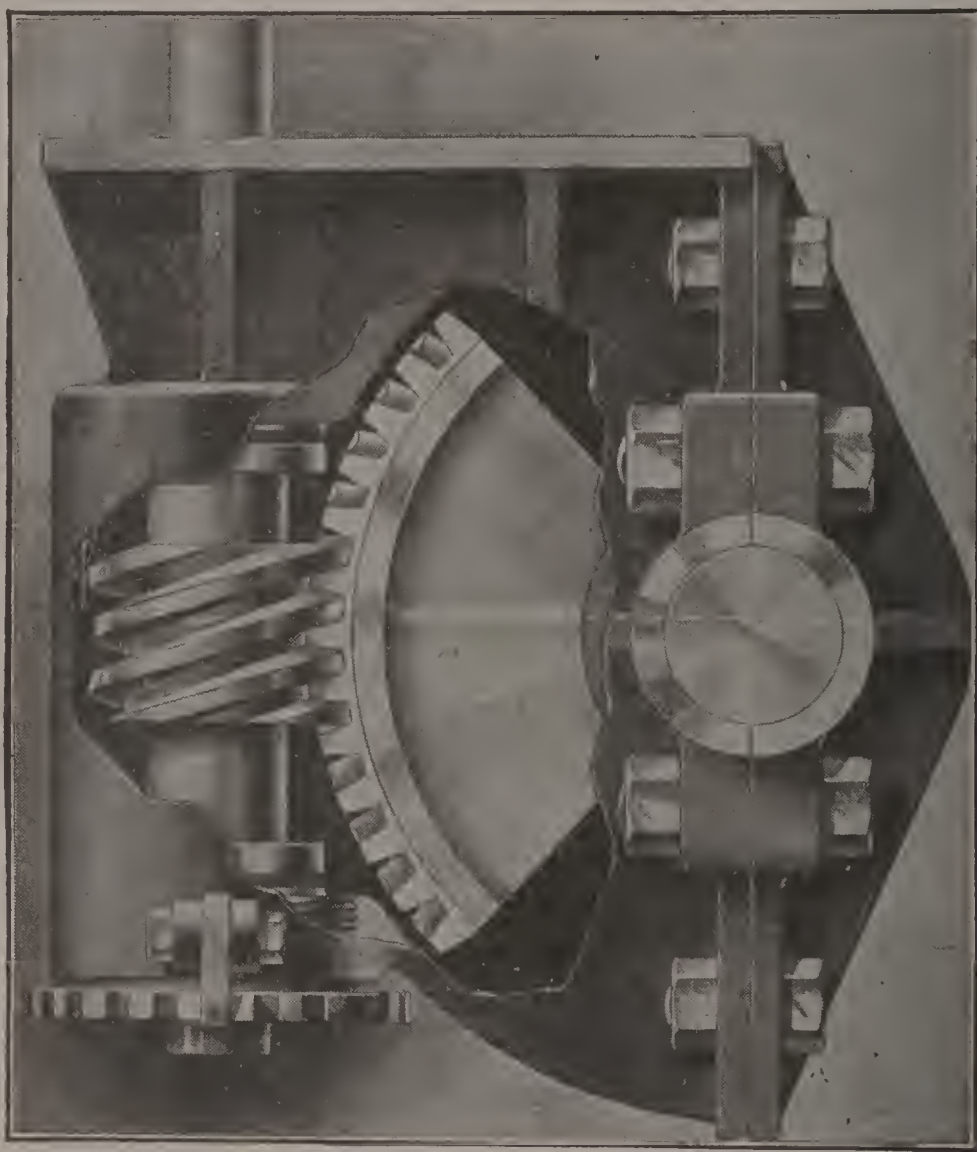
Hindley Worm Steering Gear for Heavy Trucks
